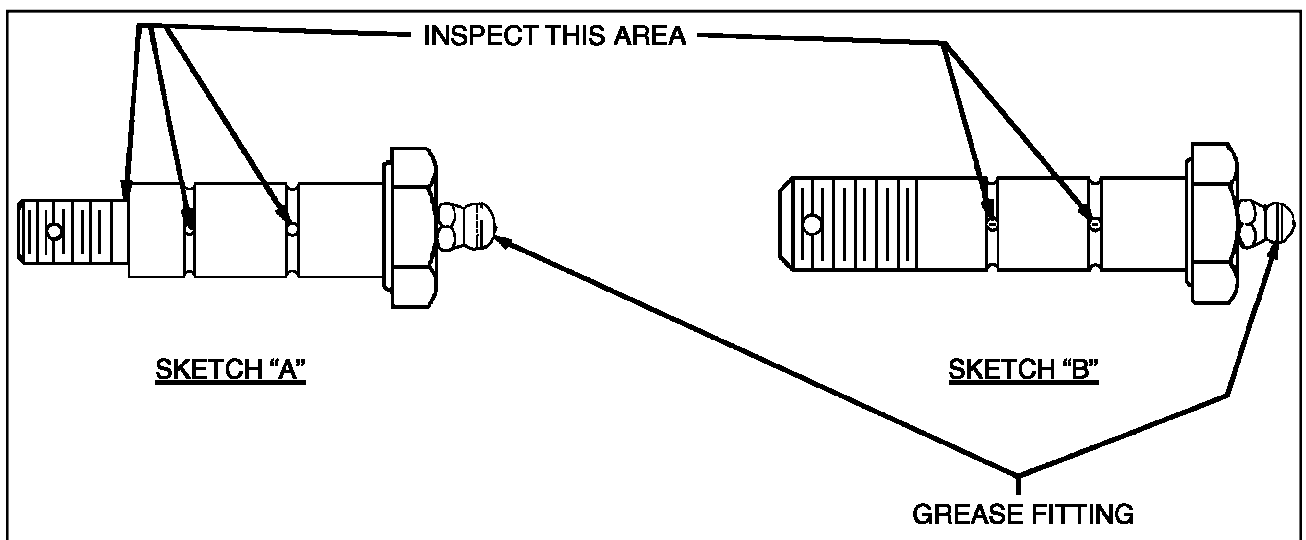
Main Landing Gear Torque Link Greaser Bolt Inspection
